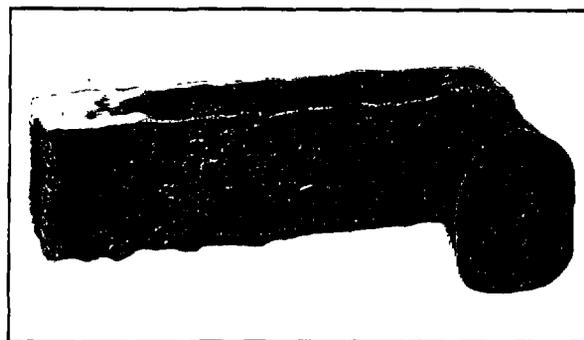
Elektron casting poured in a thoroughly dried mould of ordinary moulding sand
